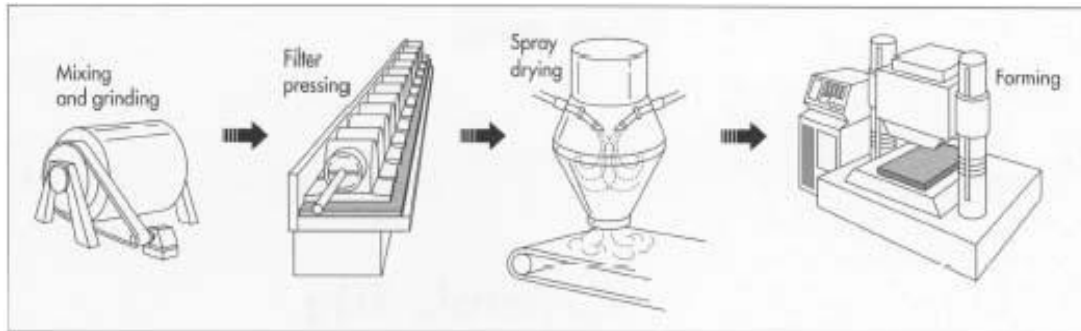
1: The step-in manufacturing ceramic tiles is mixing the ingredients. The leftover water is removed by pressing filter and spray drying. The powder is then pressed into the desired tile body shape.
